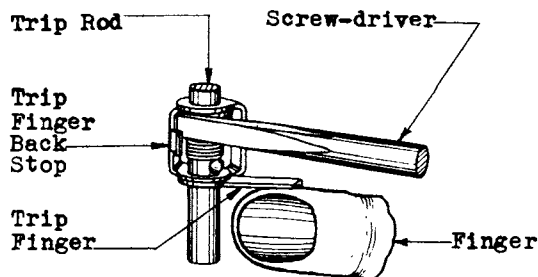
Method of Adjusting Trip Finger Back Stops
